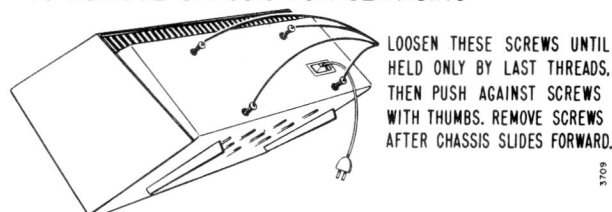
Rear View of Cabinet Showing Chassis Mounting Screws.
